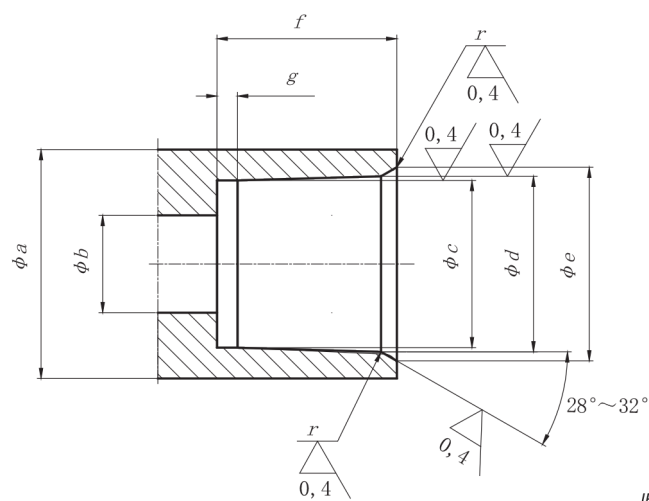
Gauge for outer contact of connector with pin centre contact (for dimensions, see Table 4)
